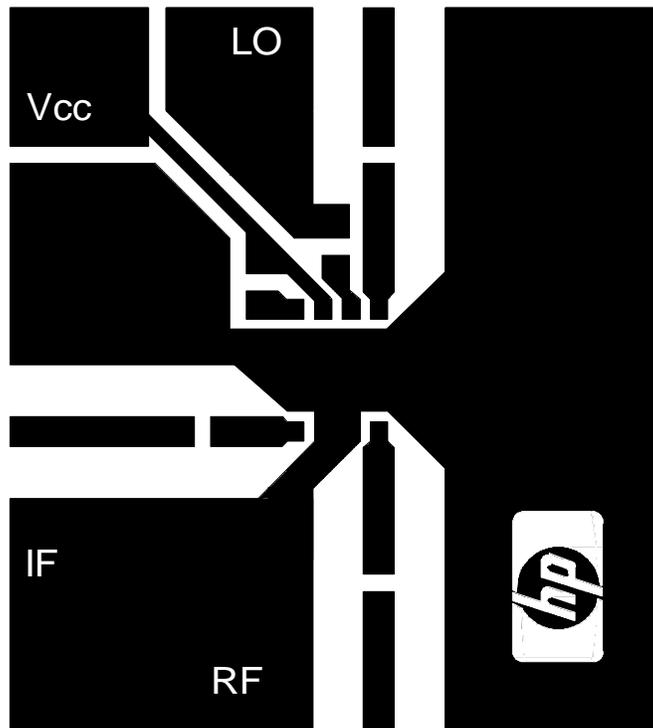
Scale layout of demo board. Finished board size is 1.3" x 1.275" x .033".
